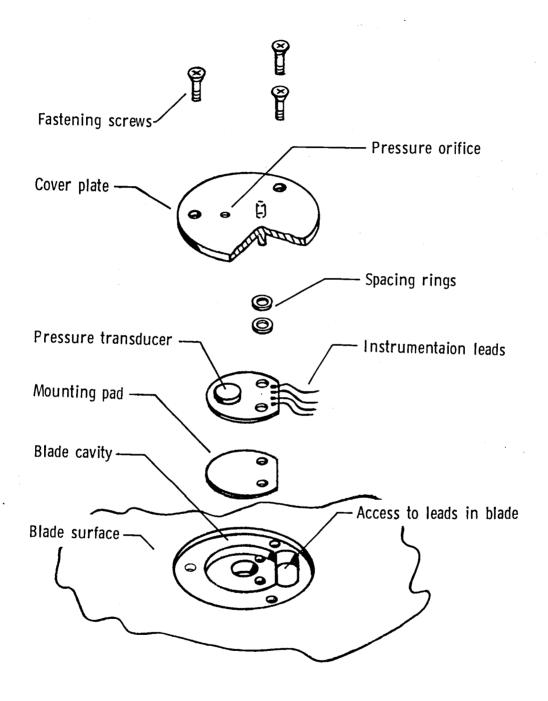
Exploded-view drawing of typical pressure-transducer installation.
